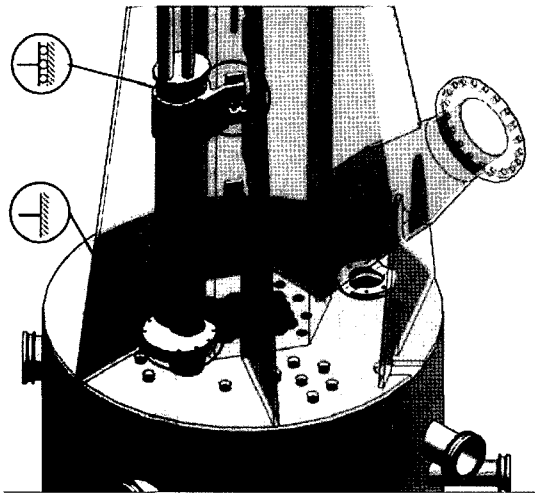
Mounting of the Vacuum Chamber at the Chimney Flange and Chimney Wall
